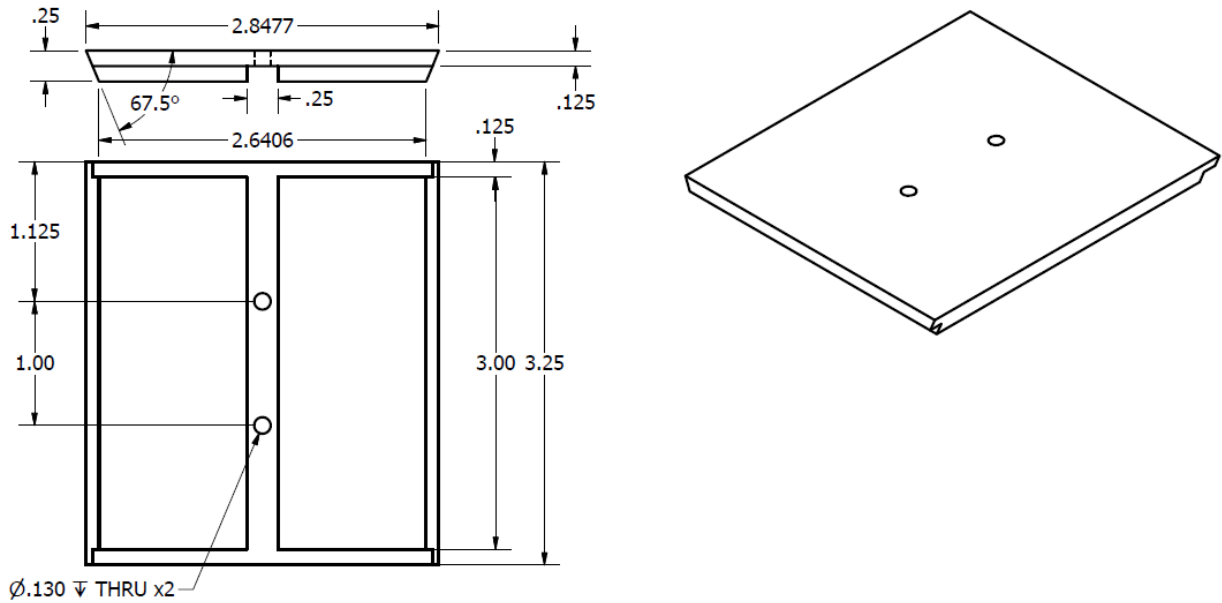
Wind tunnel extension slideway drawing. Two were manufactured and form the top and bottom of the extension with a guideway for the support strut. Measurements in inches.
